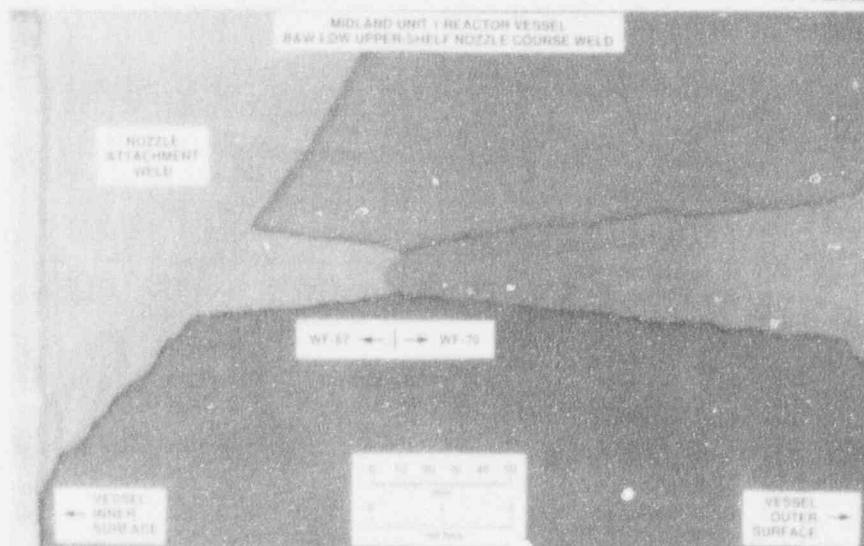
Macrograph of Midland nozzle course weld section 3-1 showing weld WF-67 on the inner half and WF-70 on the outer half. A nozzle attachment weld appears in this section.
